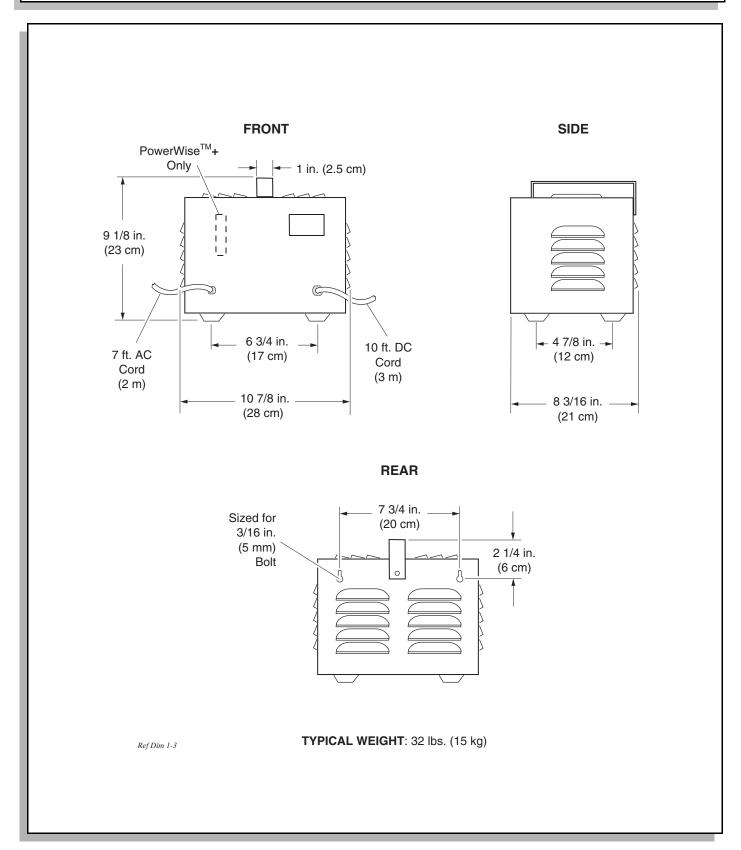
PowerWise™ Portable Battery Charger Dimensions
